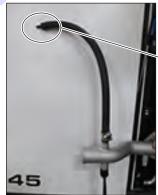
Heat Cable Through PCV Hose—No Yellow Visible
